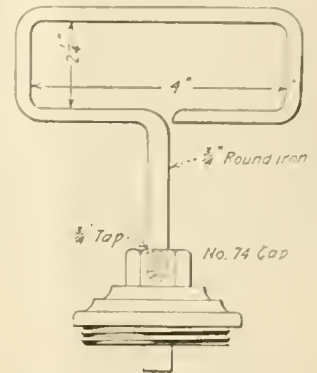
JIG FOR TOP HEADS OF AIR PUMP.
